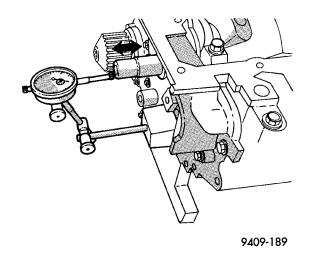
Checking Crankshaft End Play— Dial Indicator
